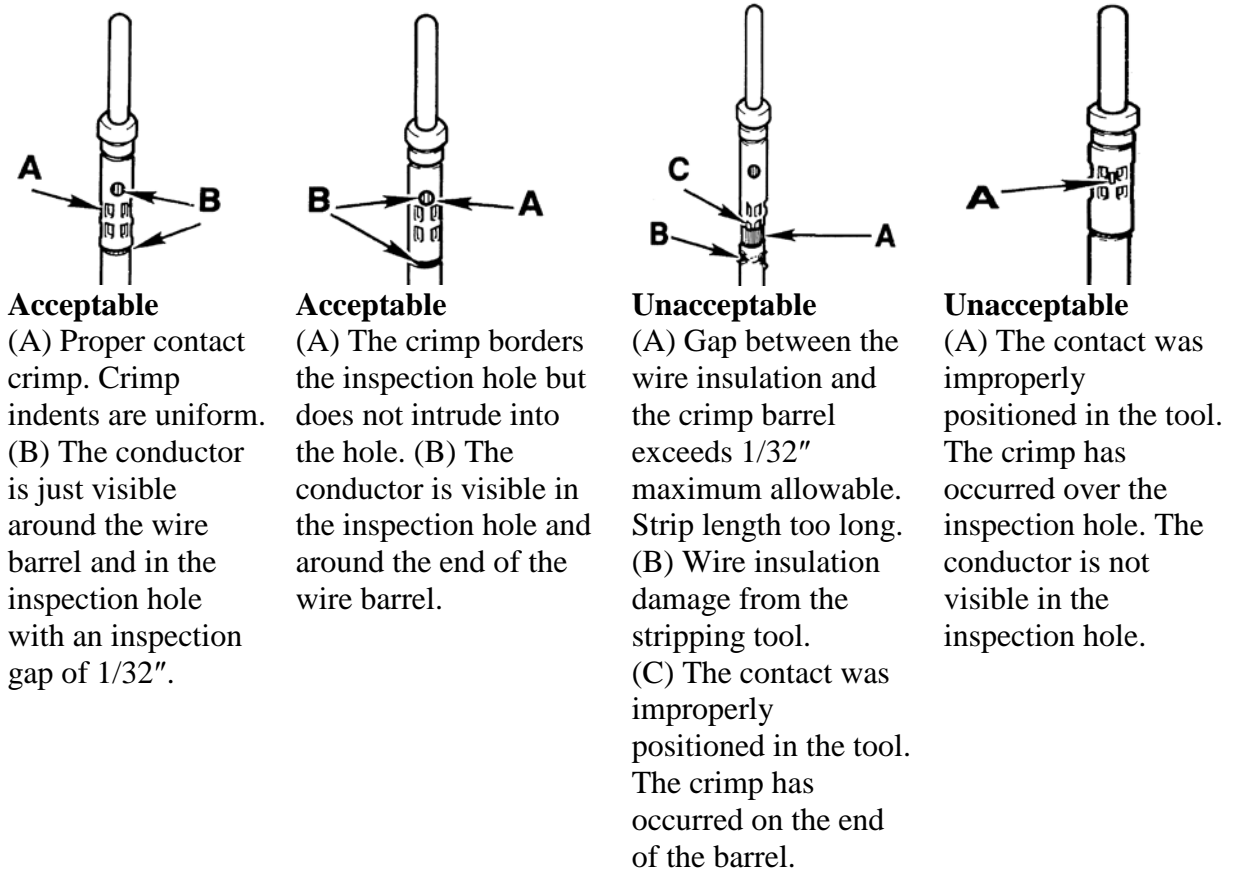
Examples of acceptable and unacceptable crimp indents and their location with the inspection hole.
